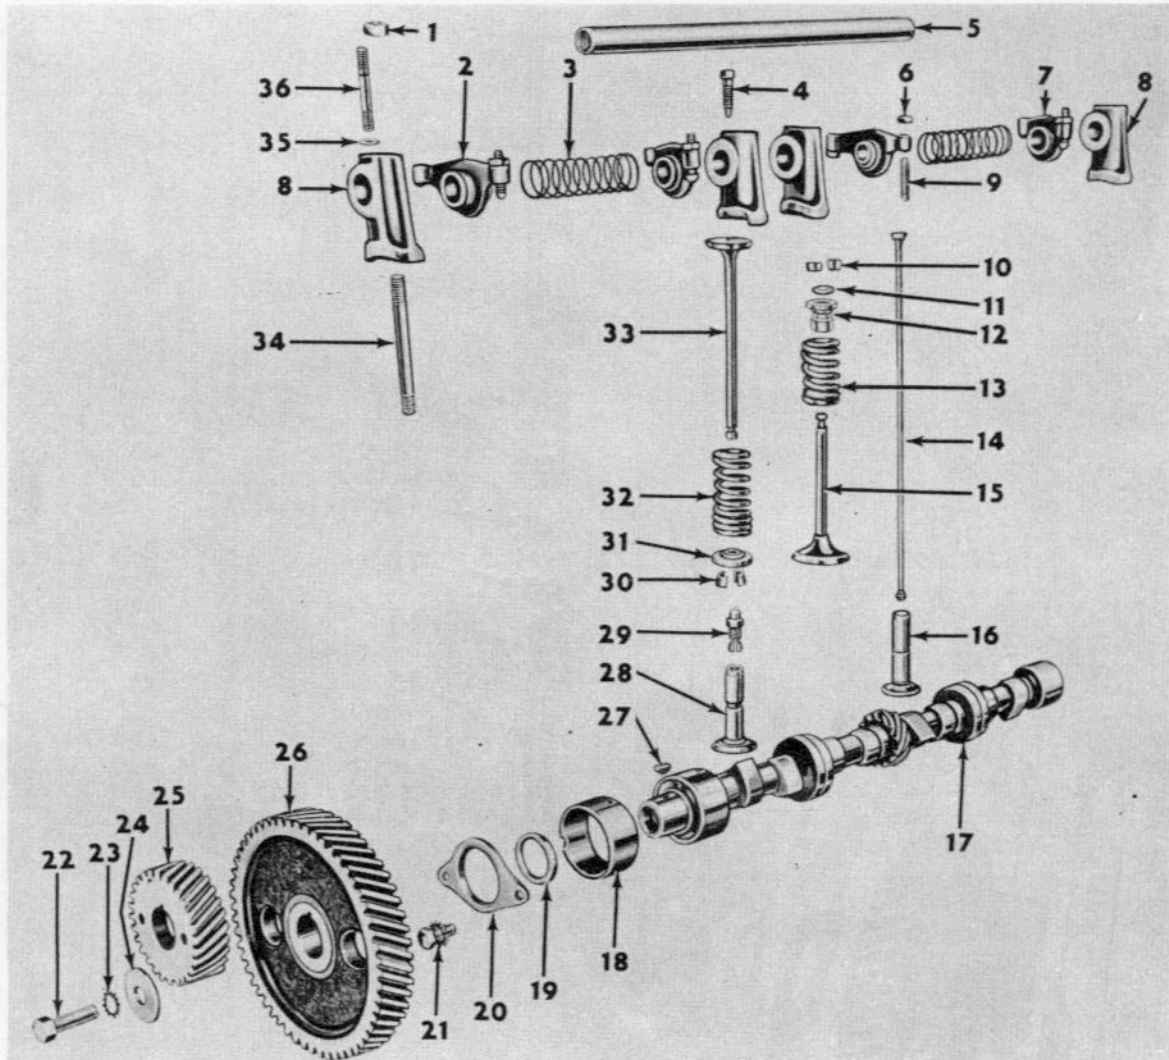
CAMSHAFT, TIMING GEARS AND VALVES—4F
